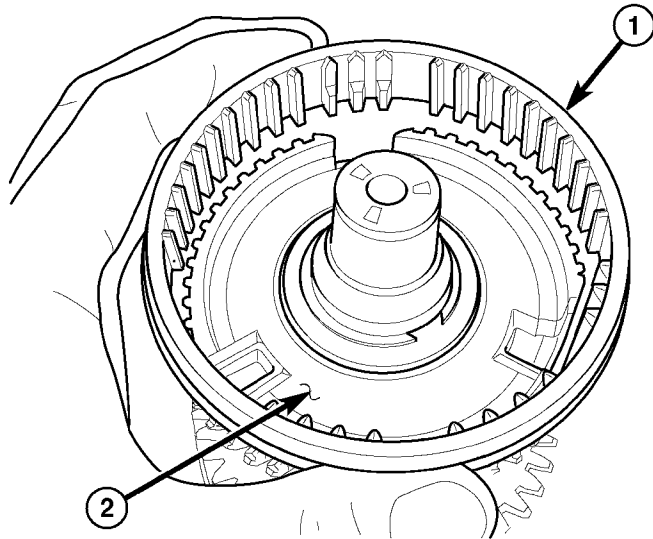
5-6 SYNCHRONIZER SLEEVE
